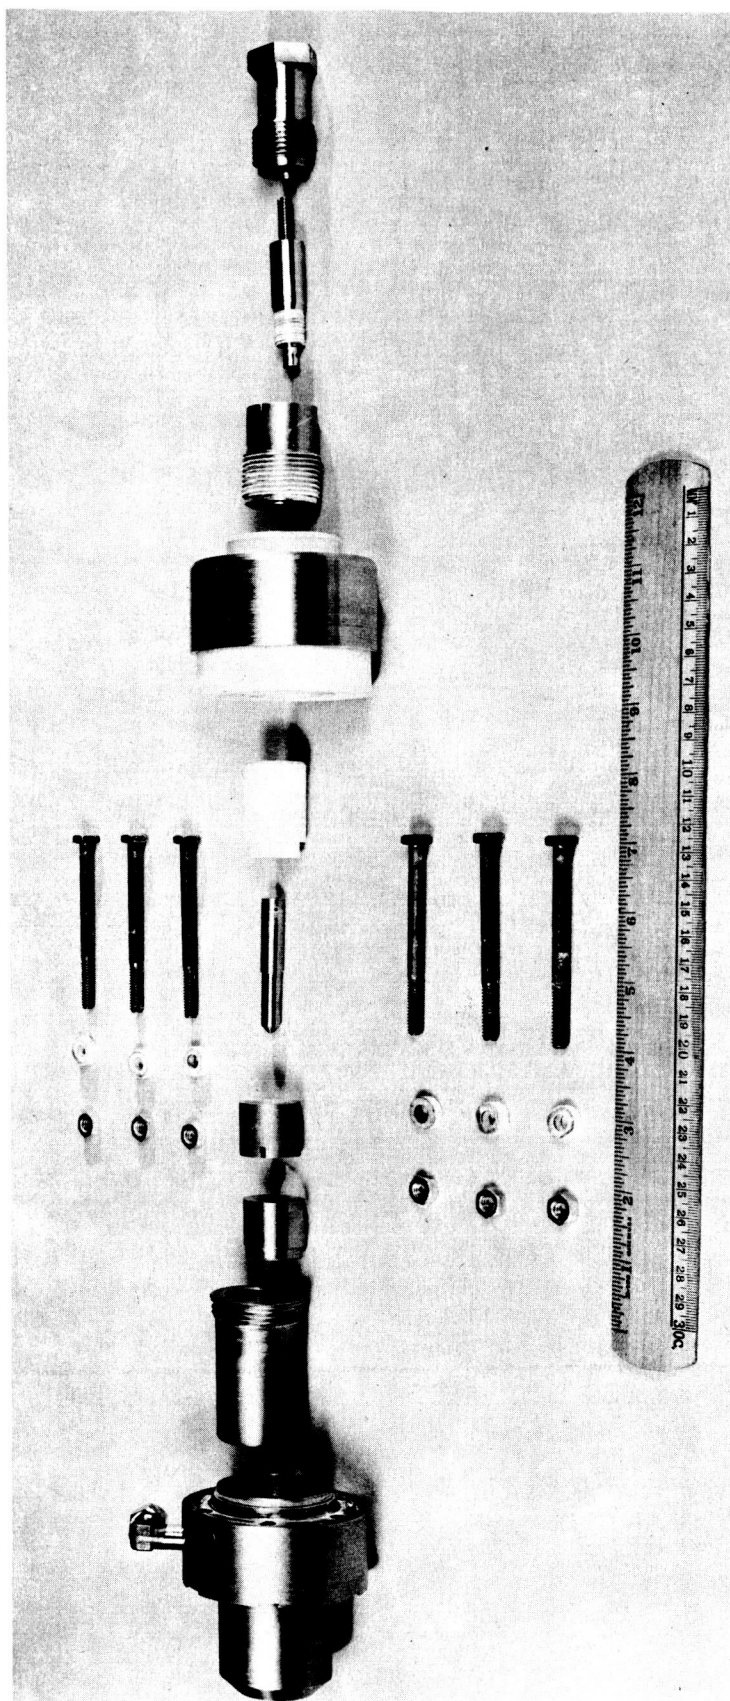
Exploded View of Single Phase Plasma Arc Jet Engine
